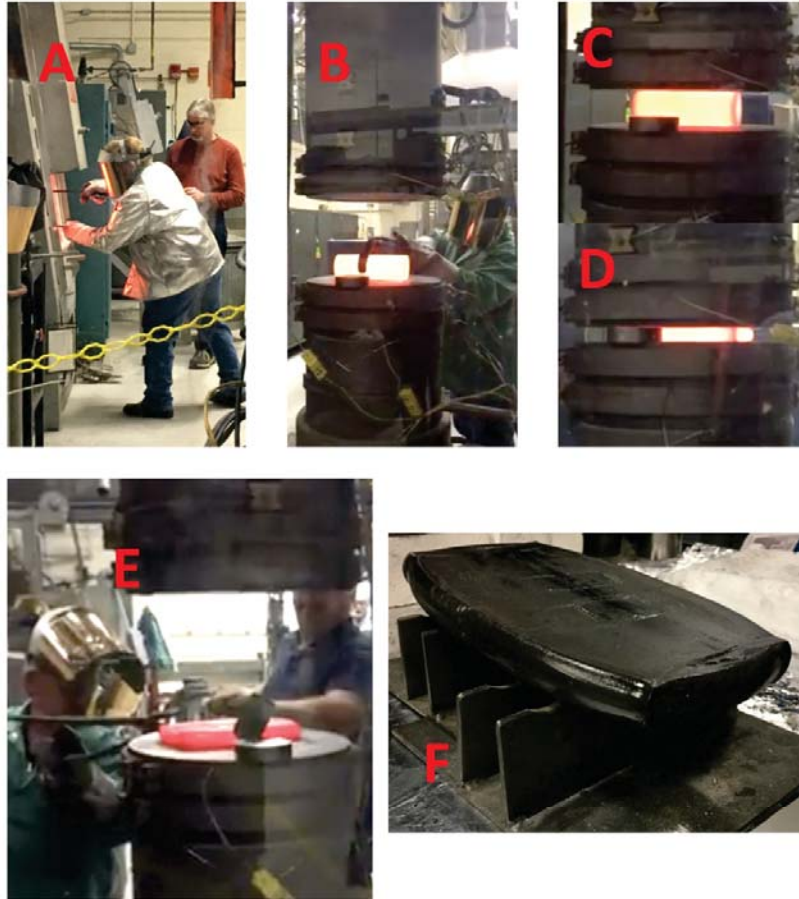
The standard forging process consists of A) removing the workpiece from the furnace and transferring to B) the press where where it dwells until C) the top die contacts the workpiece D) shows the conclusion of deformation. E) The workpiece is removed from the press and F) places on metal edges to air cool.
